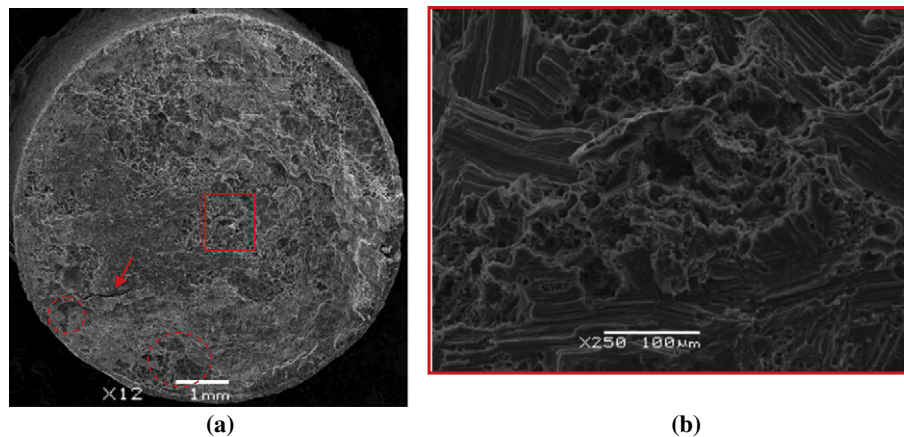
Fracture surfaces of a coated AZ31B sample after the corrosion fatigue test at a stress of 80 MPa showing: (a) overall fracture surface, dashed circle showing under surface pitting and red arrow showing crack emanating from an undersurface pit; (b) mixed mode final fracture zone, showing cleavage-type brittle fracture with dimple-like ductile fracture coexisting together.
